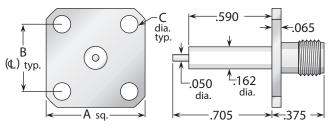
(11/16" square flange, interchangeable with BNC and TNC standard flange size)
